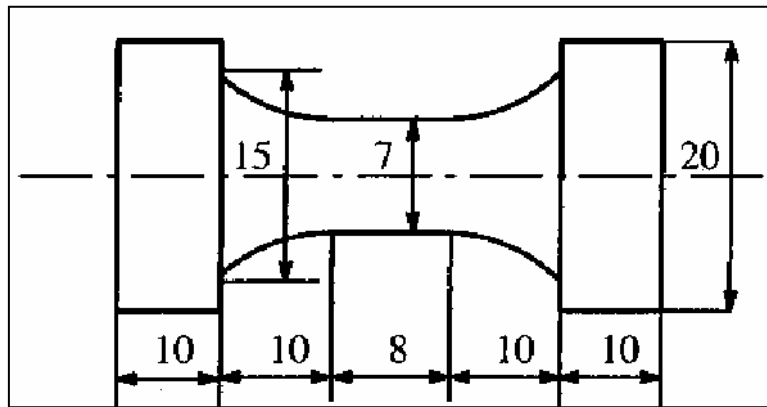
New compression SHPB specimen geometry proposed by Deltort et al.† All dimensions in millimeters.
